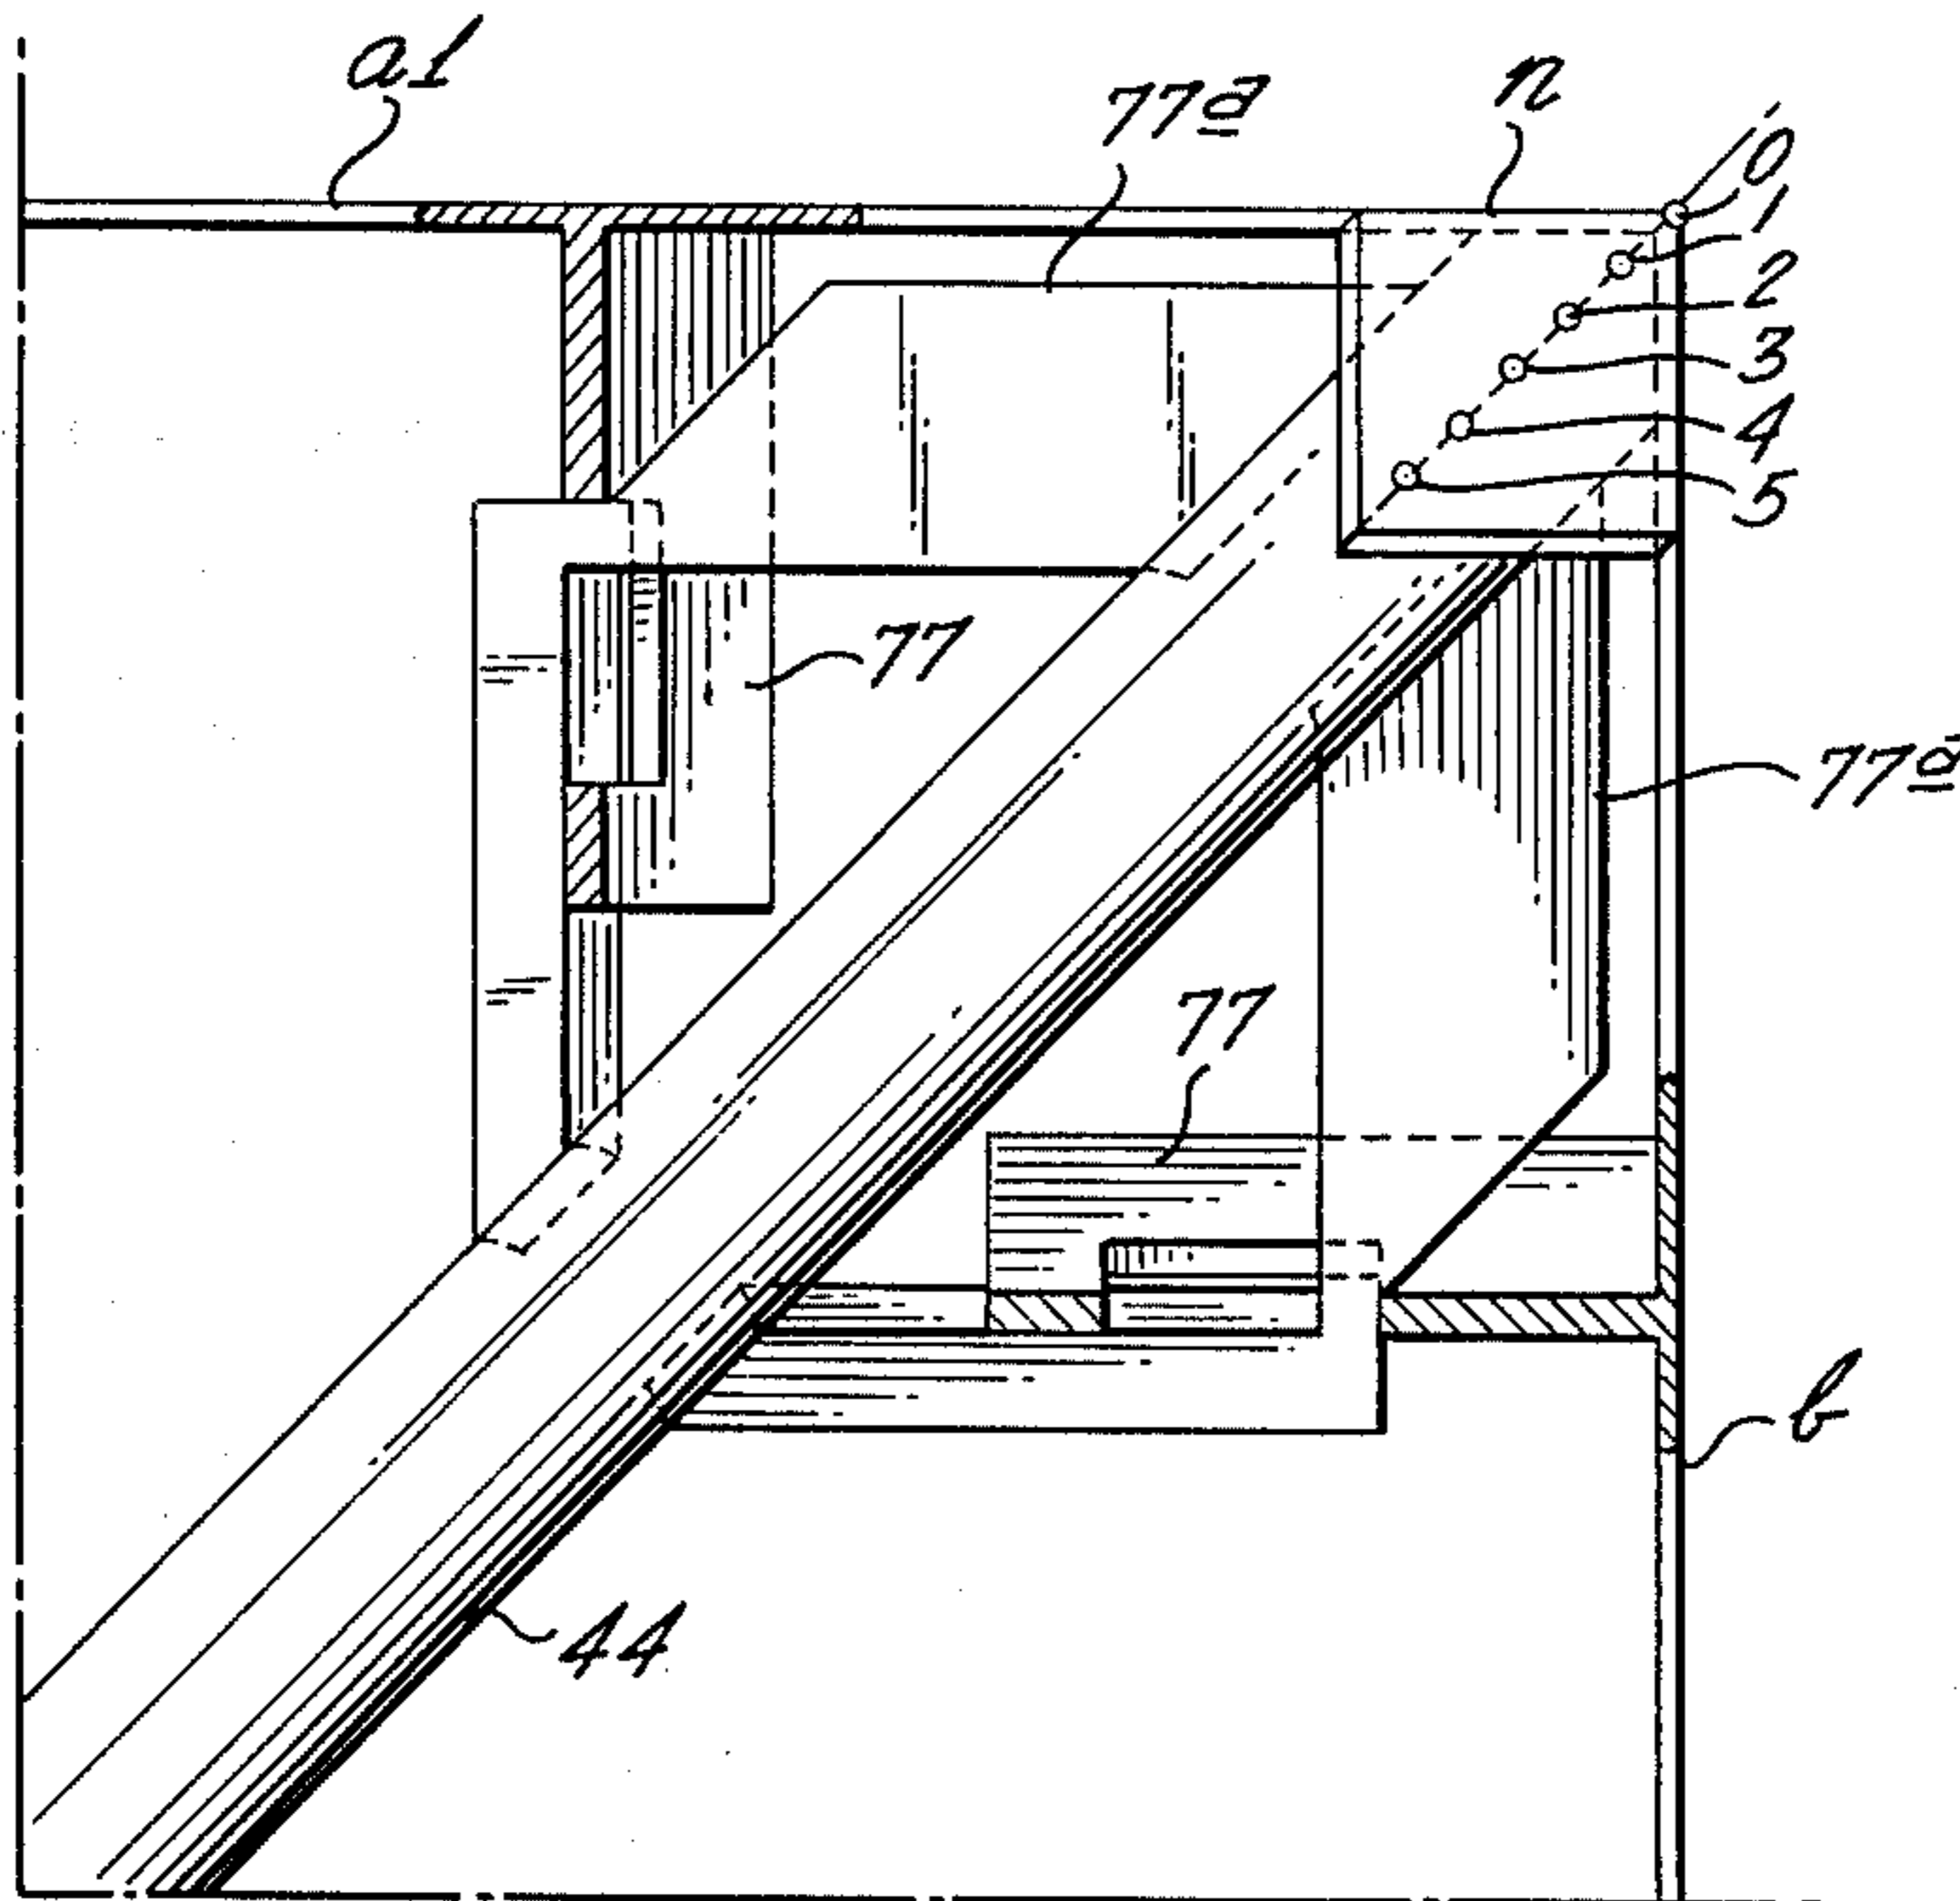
PLAN VIEW, ROD 44 RETRACTED TO POSITION #4
